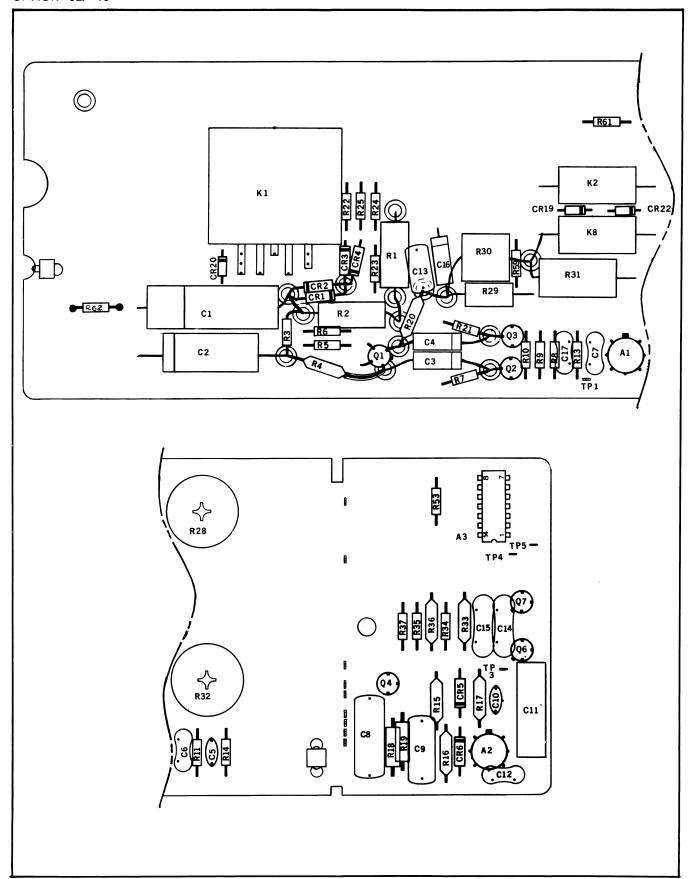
MILLIVOLT CONVERTER P/C ASSEMBLY
